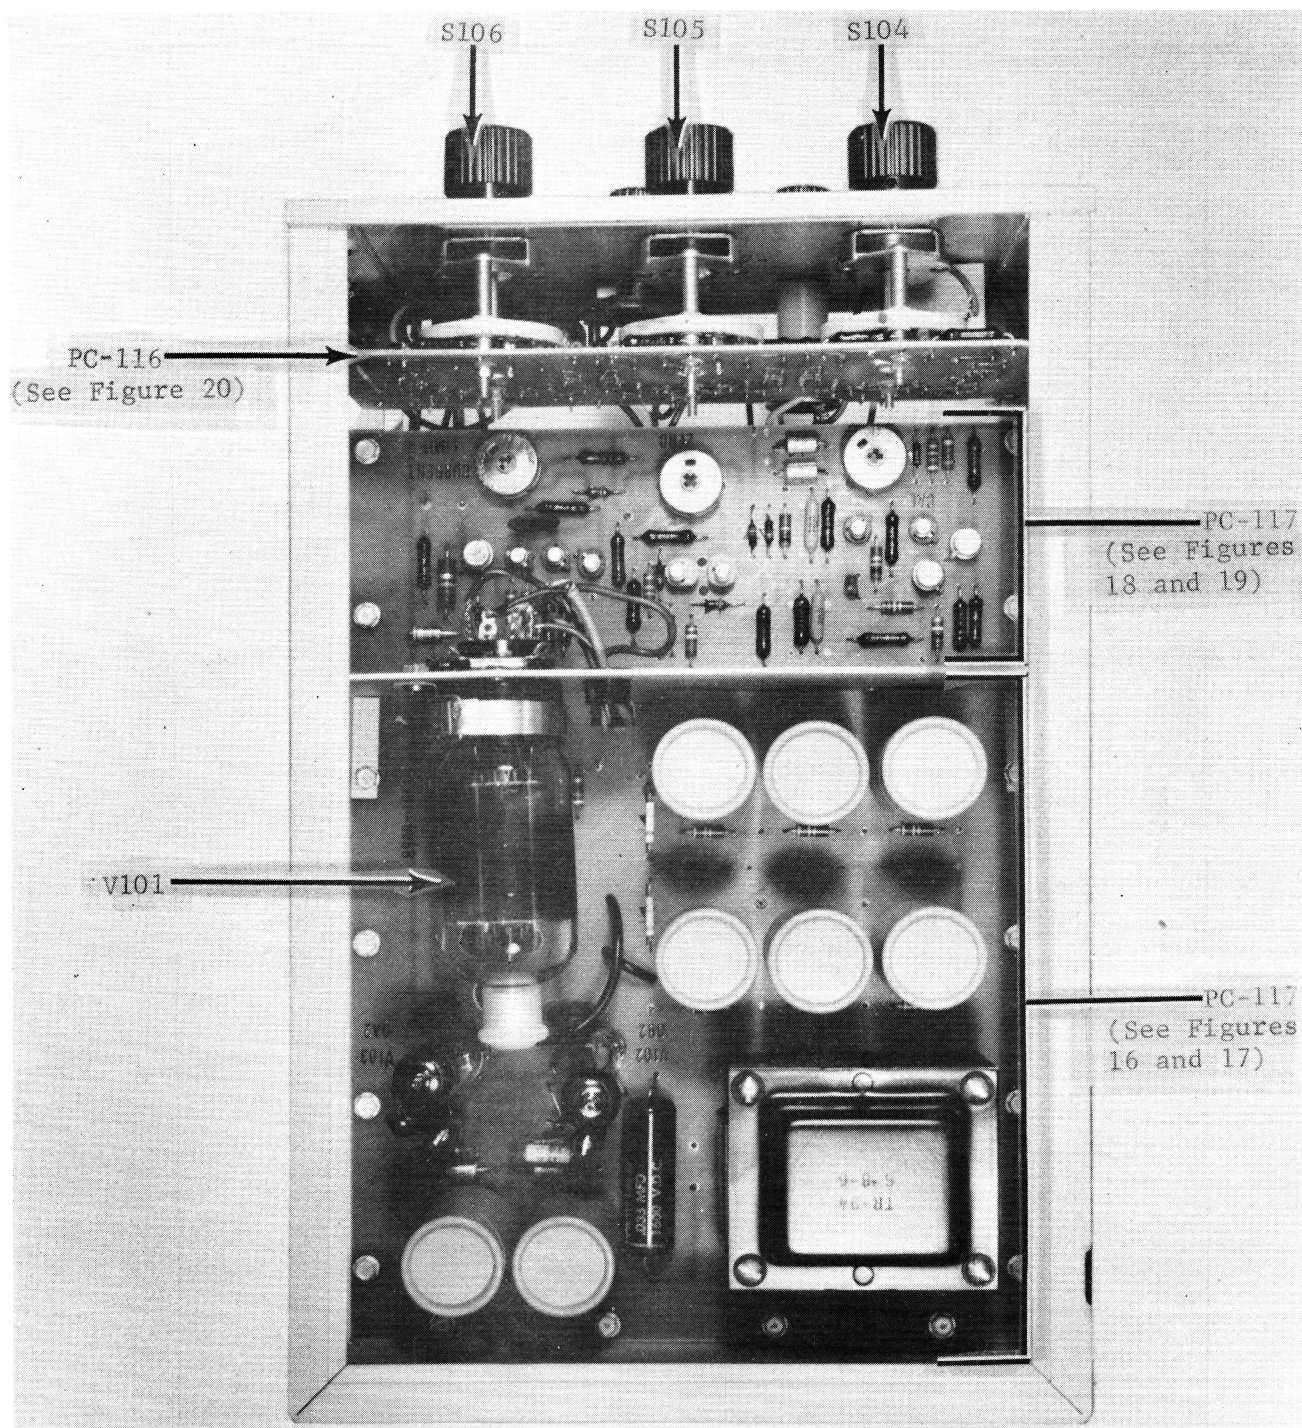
Top View of Model 240A Chassis. Locations of components, switches and printed circuits are shown. Refer to Parts List and schematic diagram for circuit designations.
